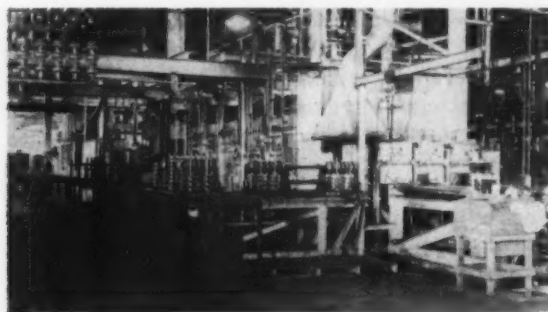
At the loading end of the Surface Combustion continuous carburizing furnaces in Clark Equipment's Jackson plant, racks of gears and parts are shown entering the furnace on a roller conveyor.
